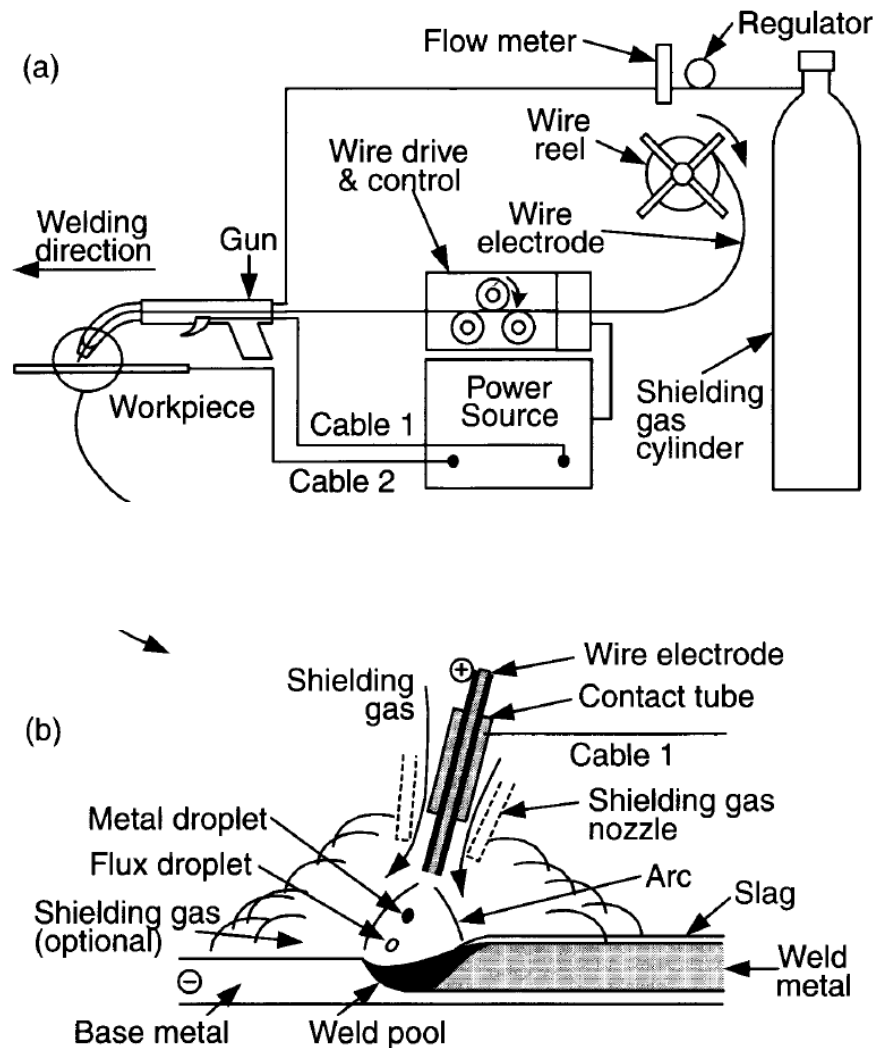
Flux core arc welding: (a) overall process; (b) welding area enlarged (16)
